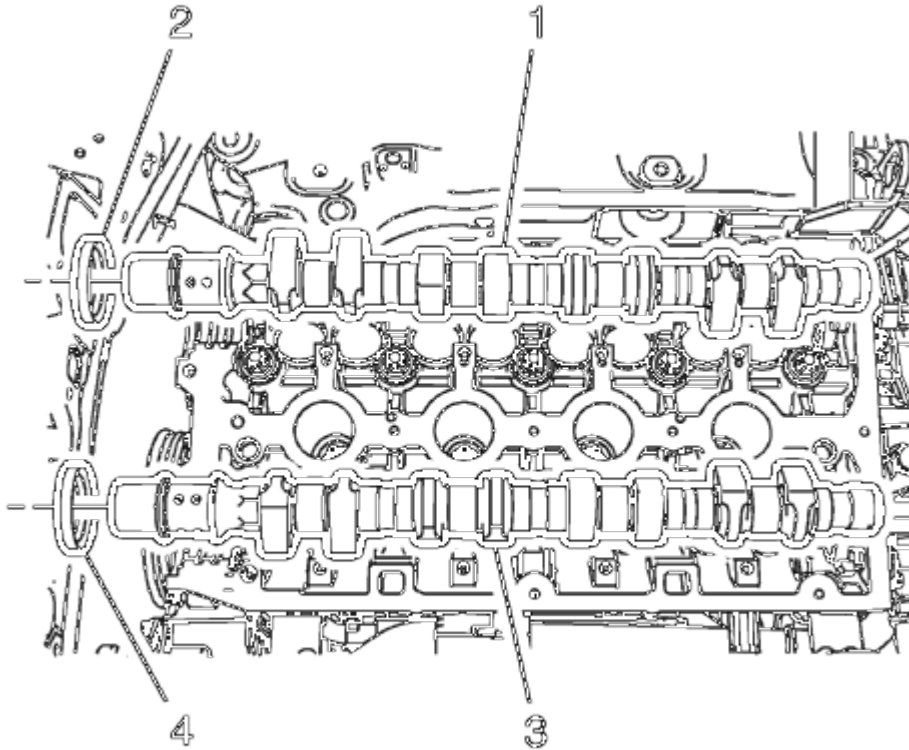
Exhaust Camshaft, Intake Camshaft & Seals
